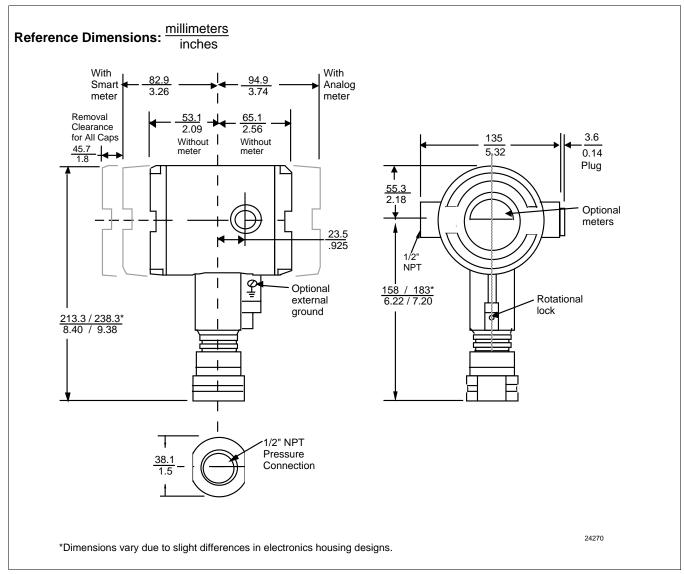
Typical mounting dimensions for in-line models STG14L, STG17L, and STG18L for reference.
